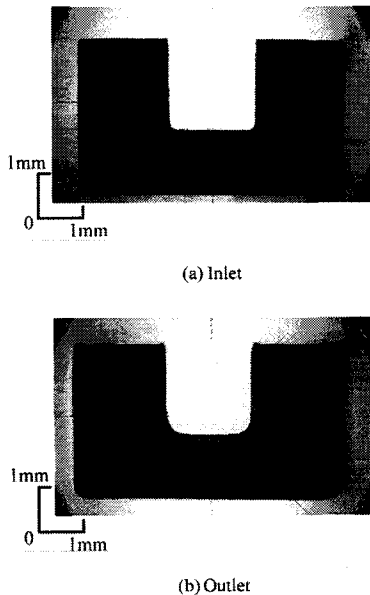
Machined square-groove by using straight electrode (Machining depth:3mm)
